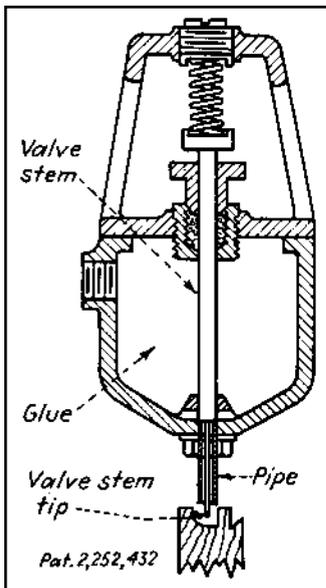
A shoulder on a valve stem in a glue chamber retains glue until pressure on the tip opens the bottom valve.
